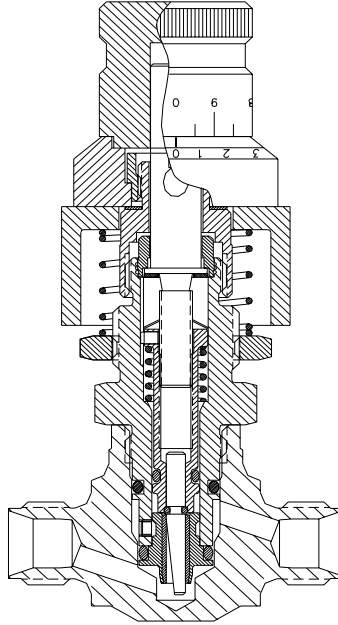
HR Series Metering Valve with Turns Counter Handle Cross Sectional View
